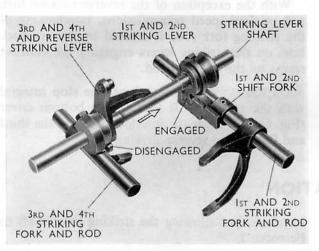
Layout of left drive gear shift mechanism (threespeed)
